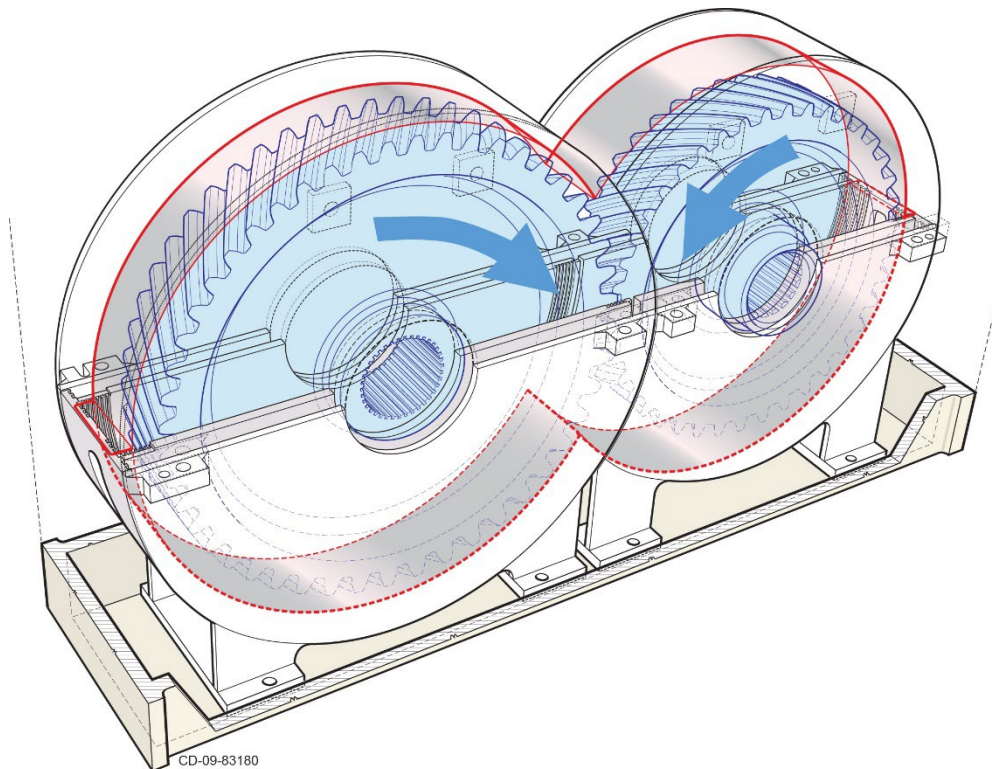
Meshed gears within clamshell housing and shrouding; arrows show direction of rotation.
